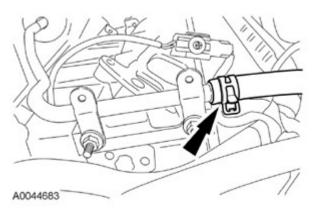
Locating Knock Sensor (KS) Electrical Connector And Engine Wiring Harness Retainers Courtesy of FORD MOTOR CO.
